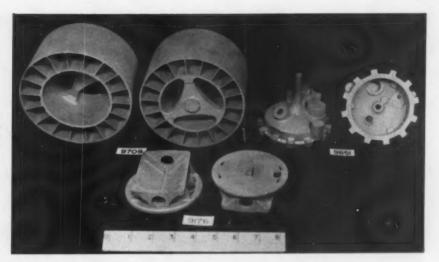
Investment cast magnesium alloy parts 9176, 9709 and 9851.
